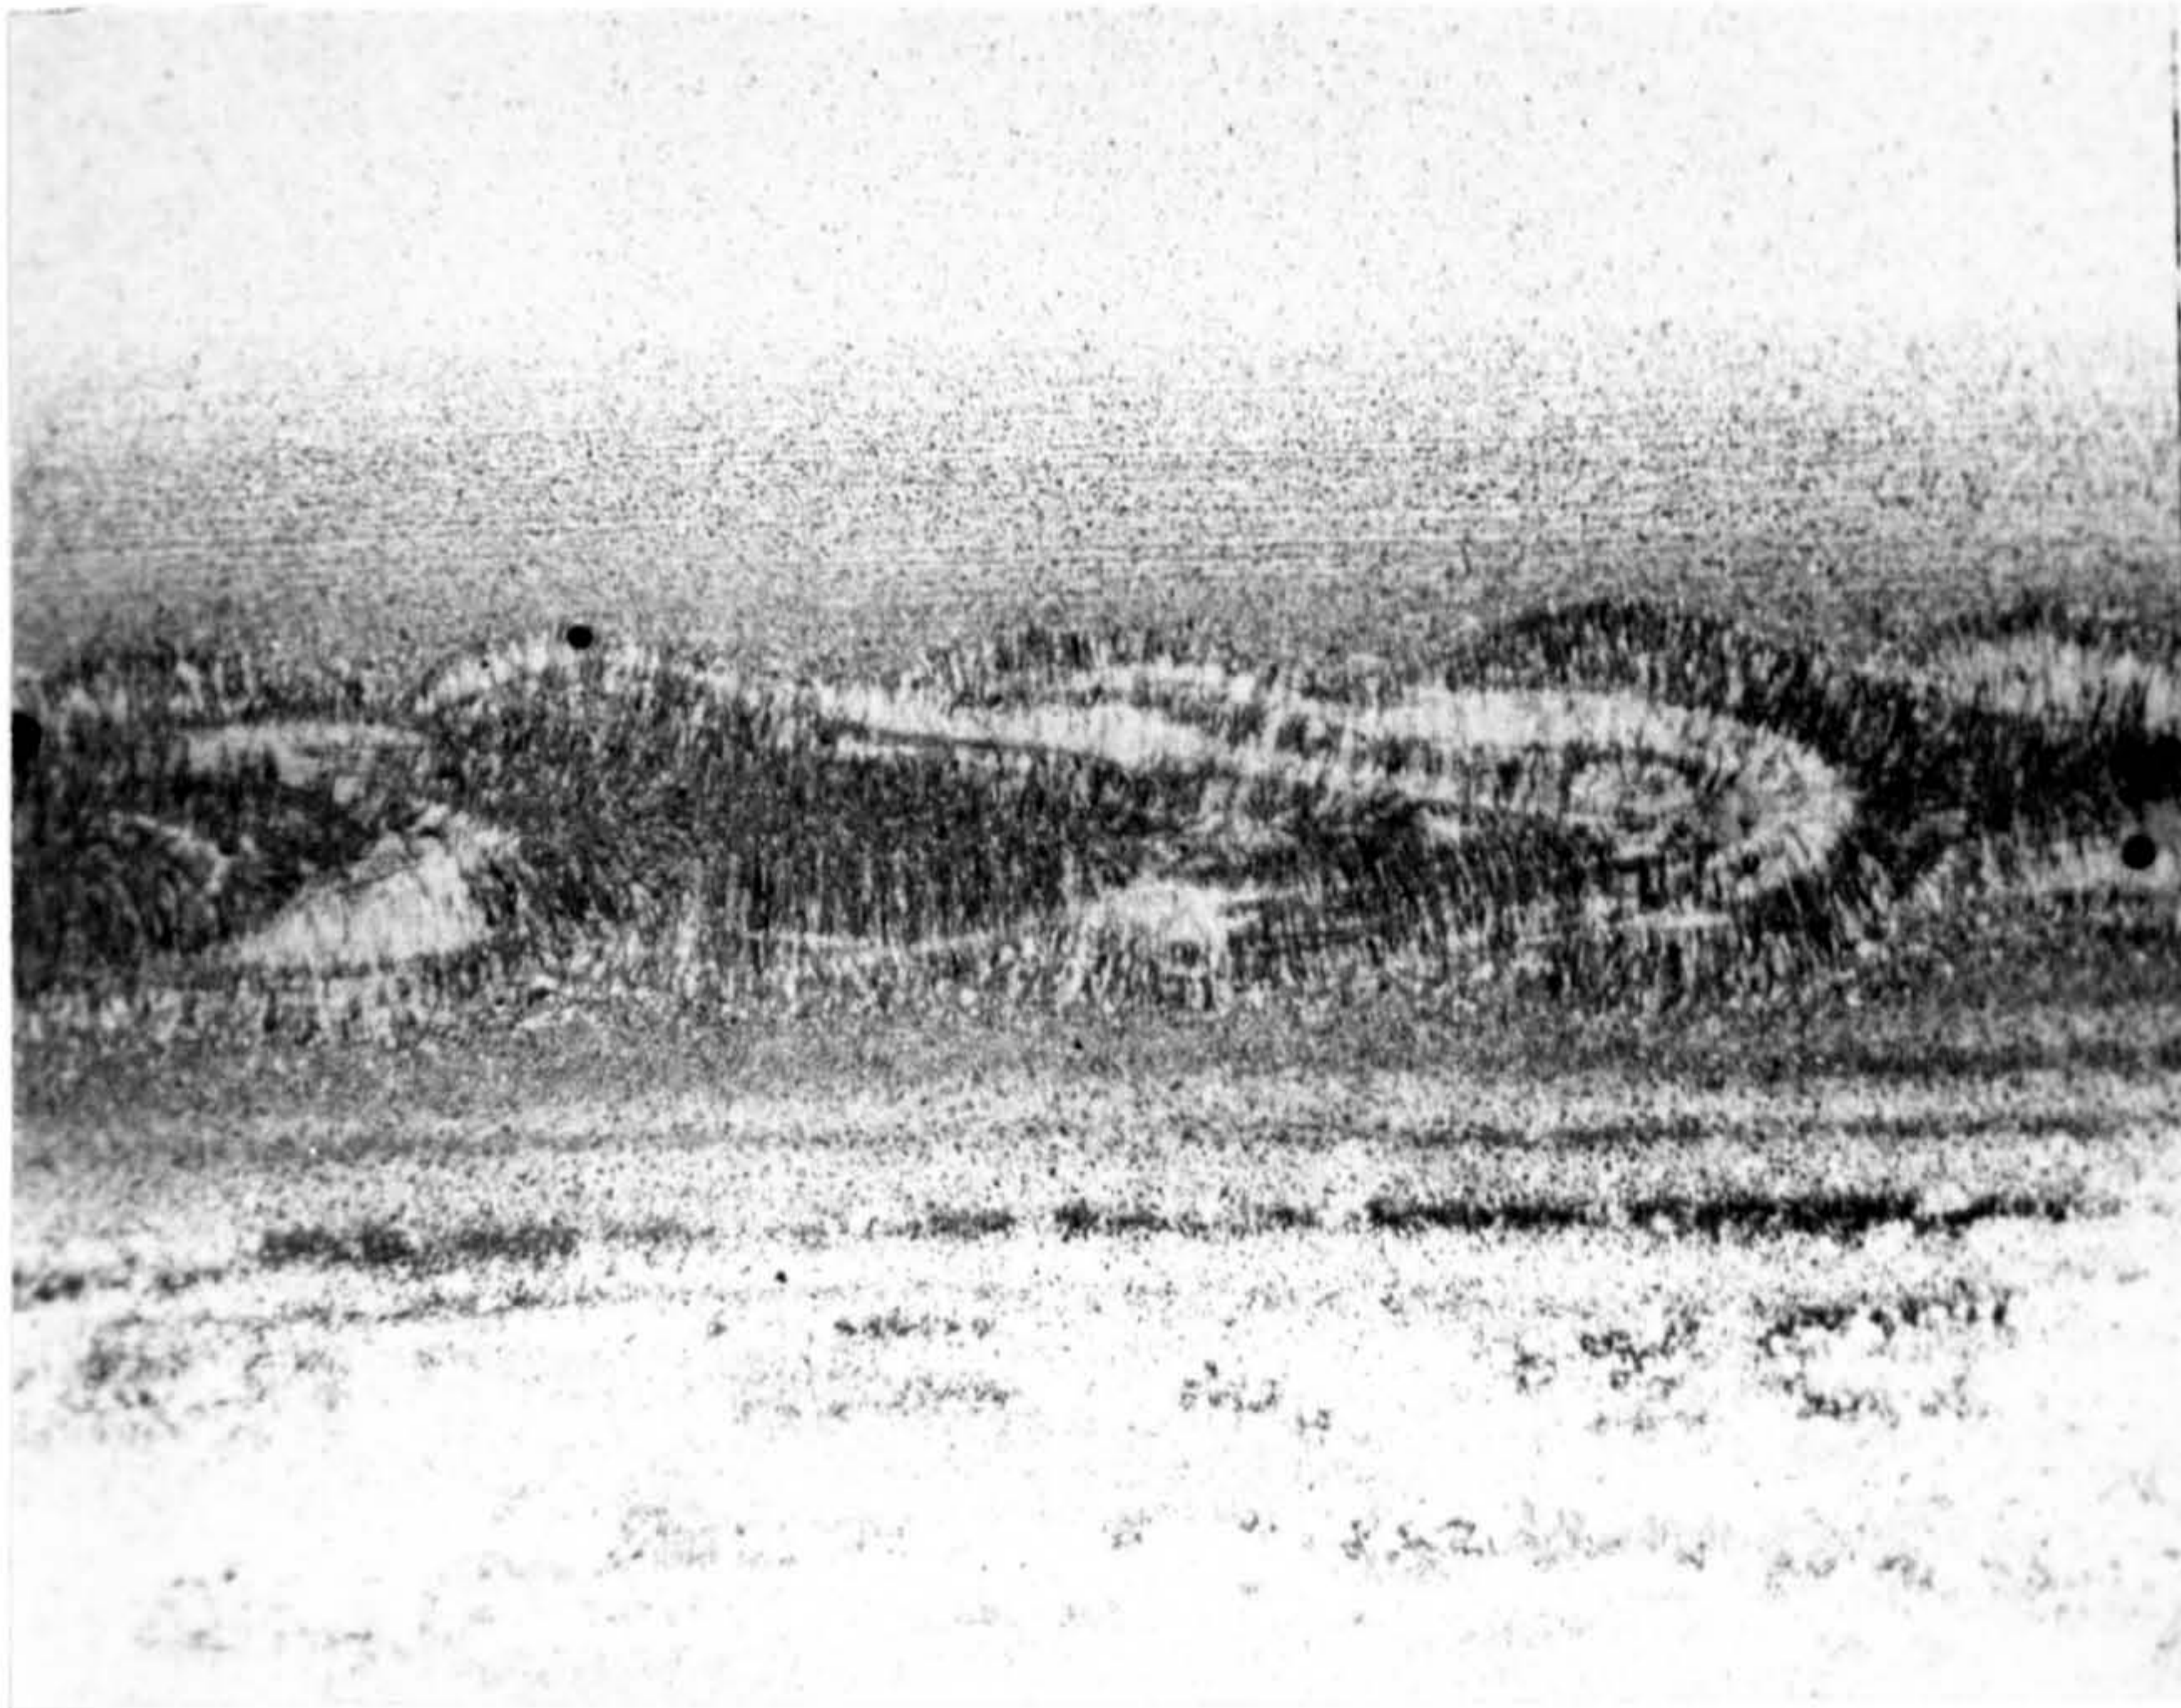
Skid weld longitudinal section; 8mm plate (x12.8)
